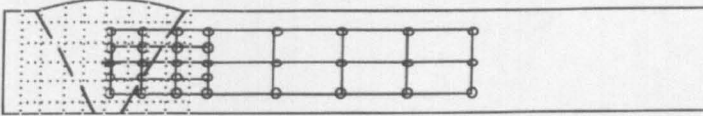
Diagram of a transverse section of a welded plate showing the location of the sampling grid on a section through the middle of the welded plate [35].
